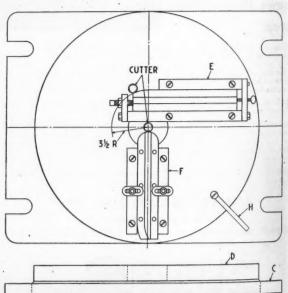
Drawing of Fixture and Cradles for Milling Radii
